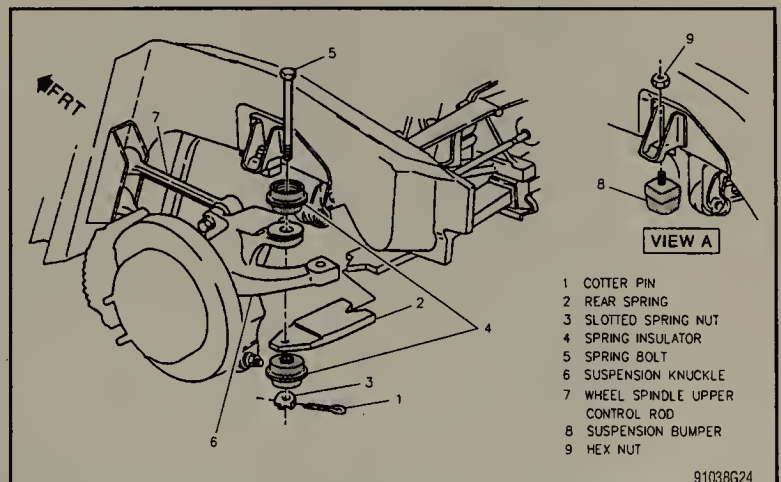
Exploded view of the rear transverse spring insulators and suspension bumper
